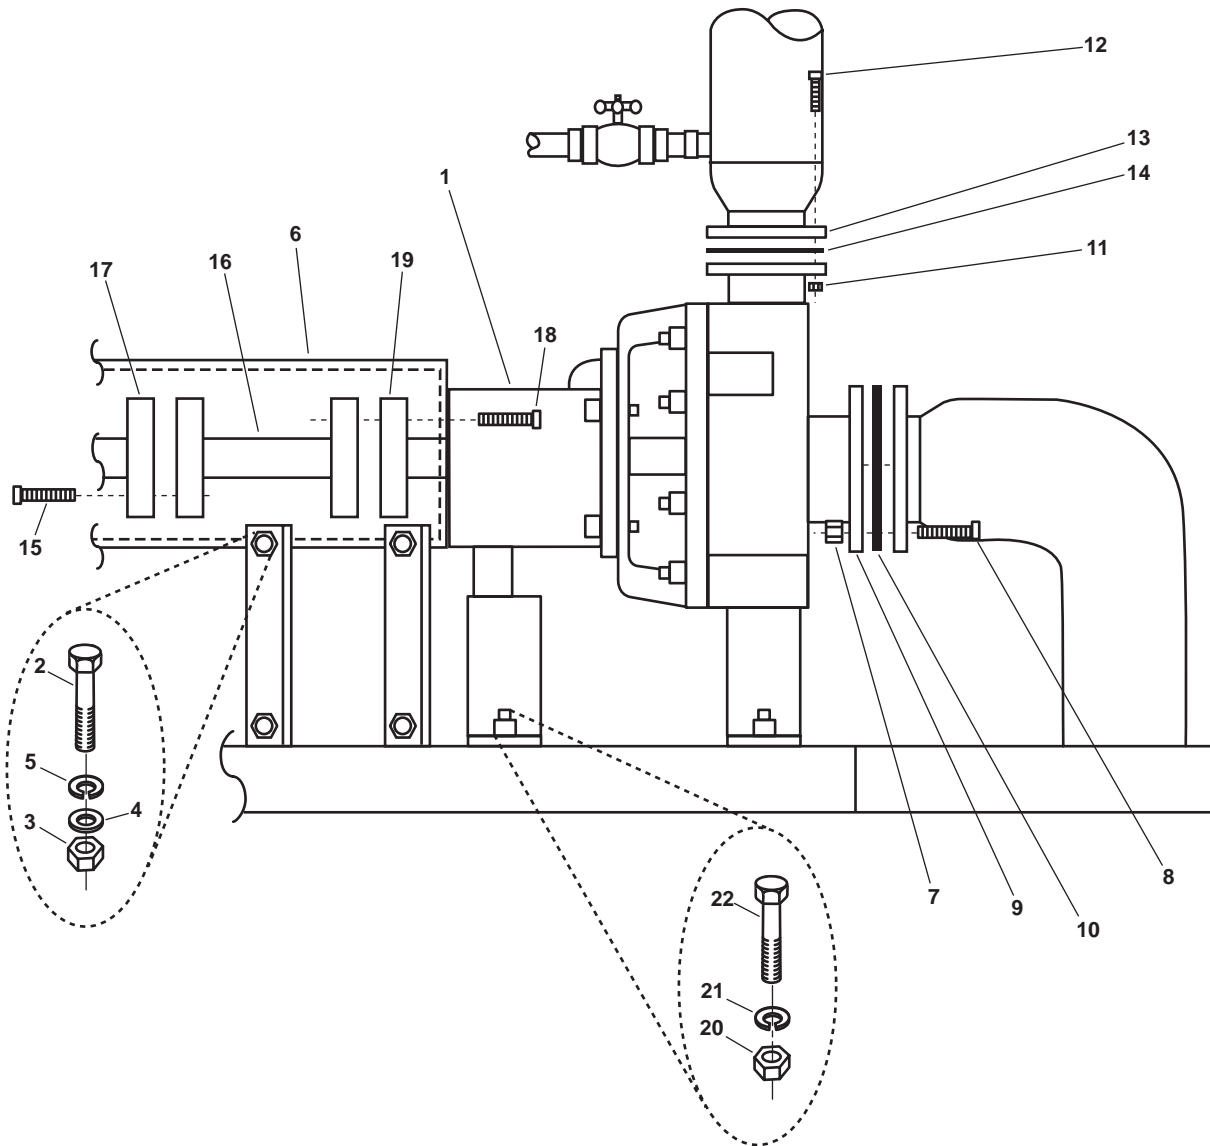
Diesel Engine-Driven Firefighting Pump Removal
